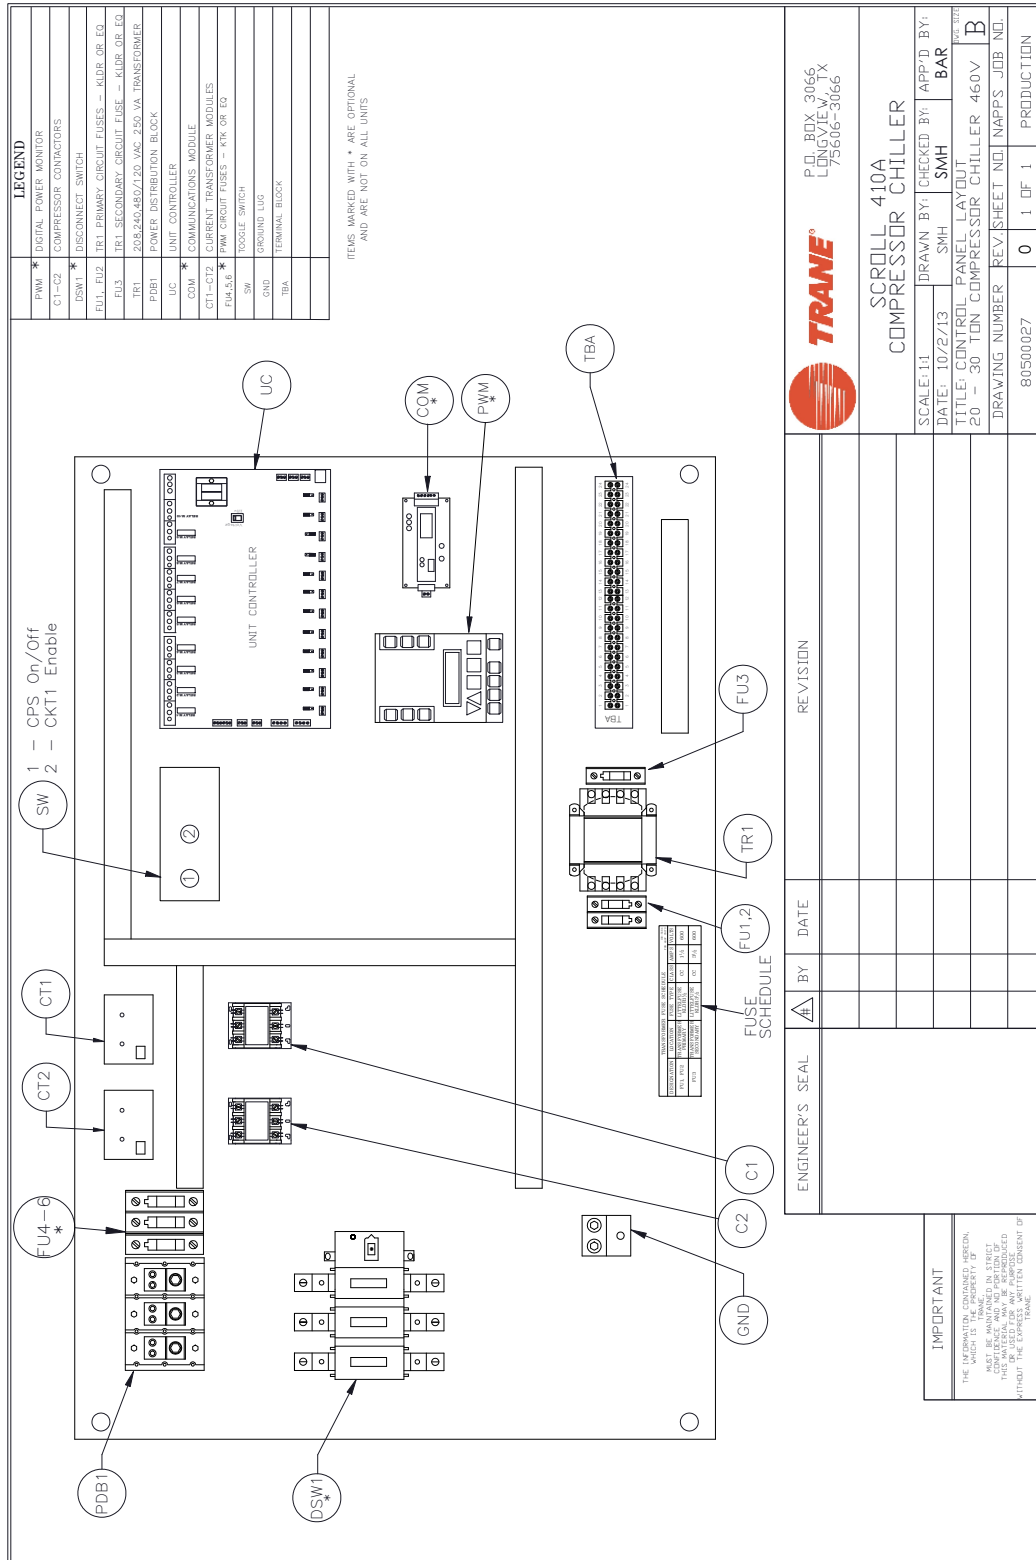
Control panel layout for 20–30 ton, 460V, R-410A CCAQ compressor scroll chillers
